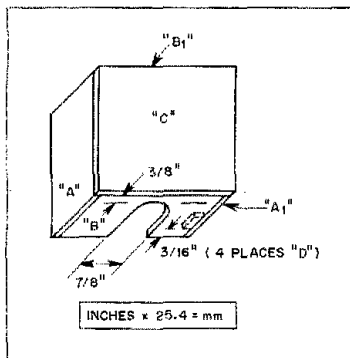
Details of the K7HNM Bencher paddle dust cover.
